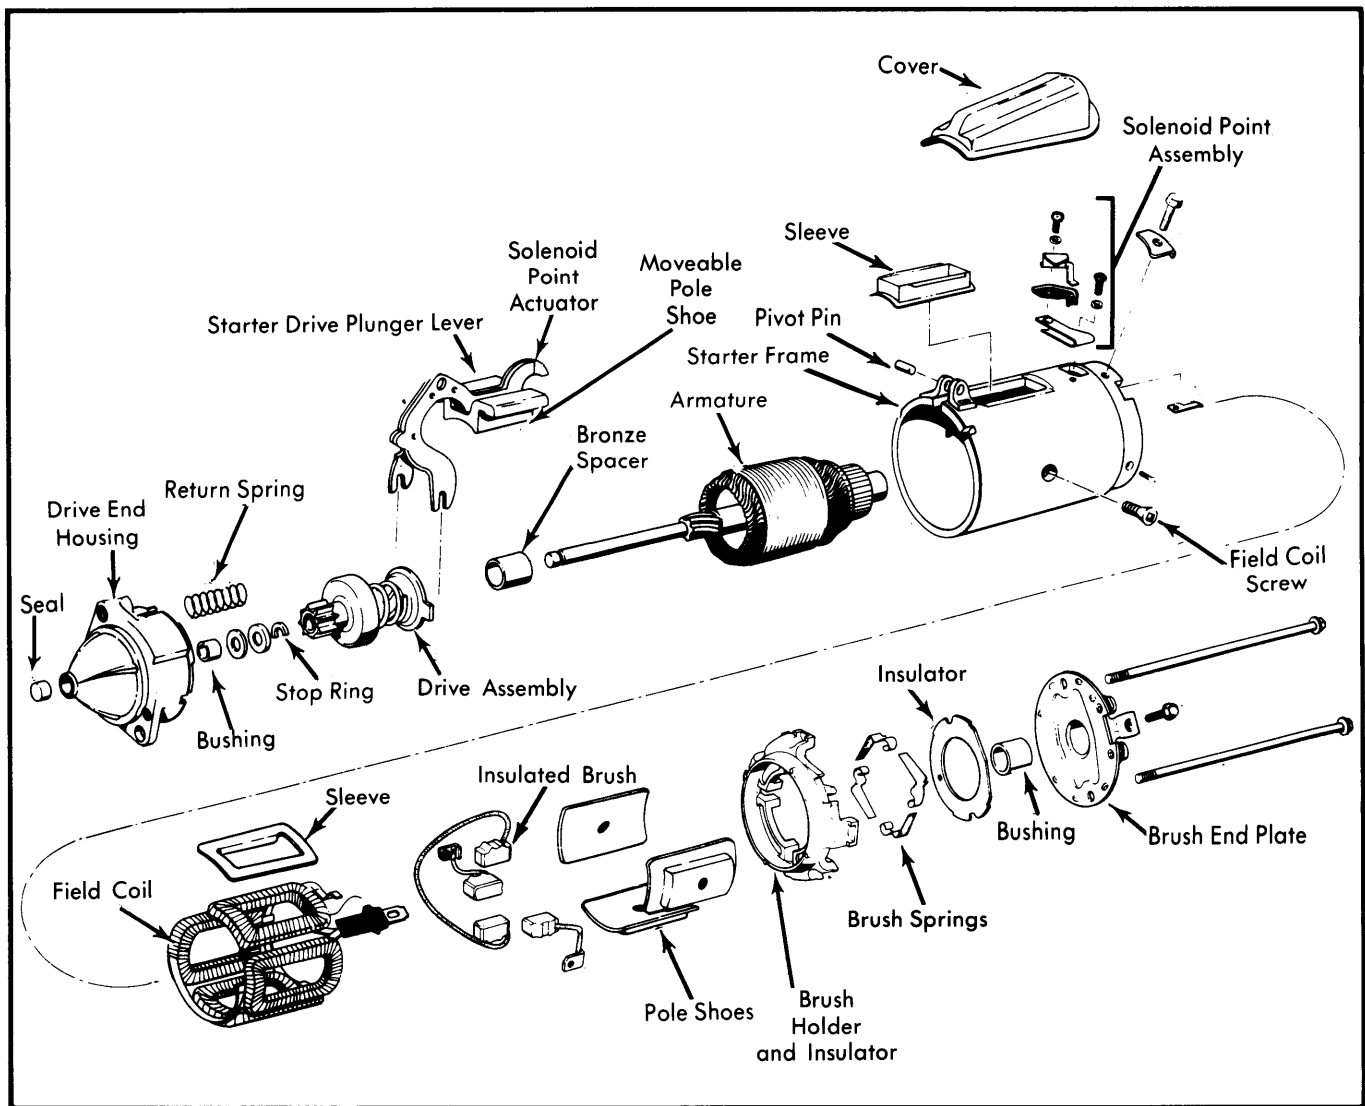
Exploded View of Motorcraft Starter Motor Assembly
